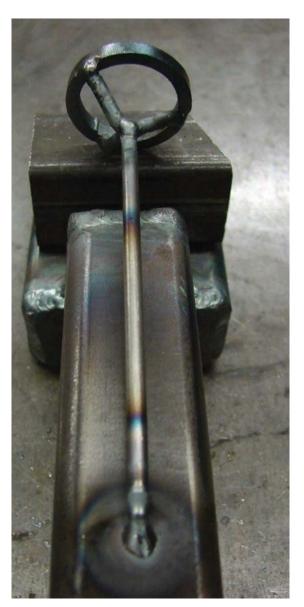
Steering bar attached to the main body with a small tack weld.
